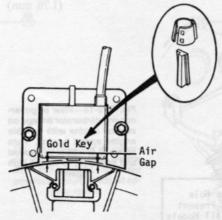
On solid-state ignition system, set coil lamination air gap at 0.0125 inch (0.32 mm) at locations shown. Ignition module will be marked (arrow) to indicate color of flywheel sleeve (S) or crankshaft key (K) that must be installed.
